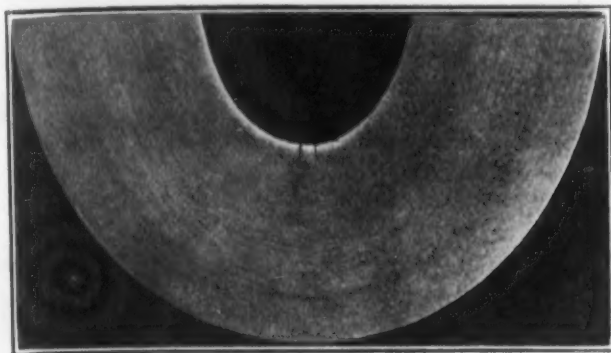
Photograph (Actual Size) of Cross-Section of Bend Test Specimen, Deep Etched to Show Radial Cracks at the Inner Surface.
